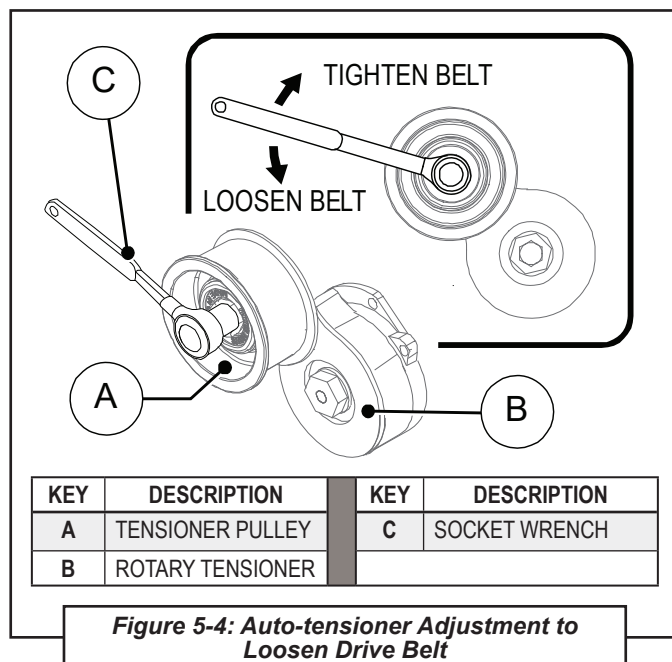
Auto-tensioner Adjustment to Loosen Drive Belt
